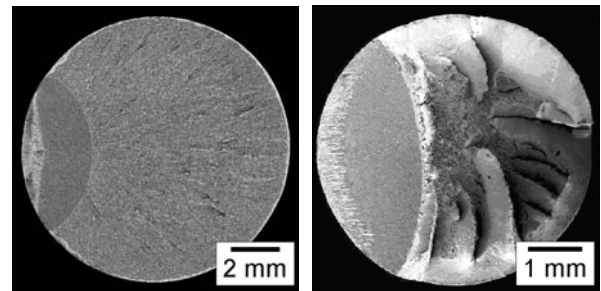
Fracture surface: E0 (left), E7 (right).
